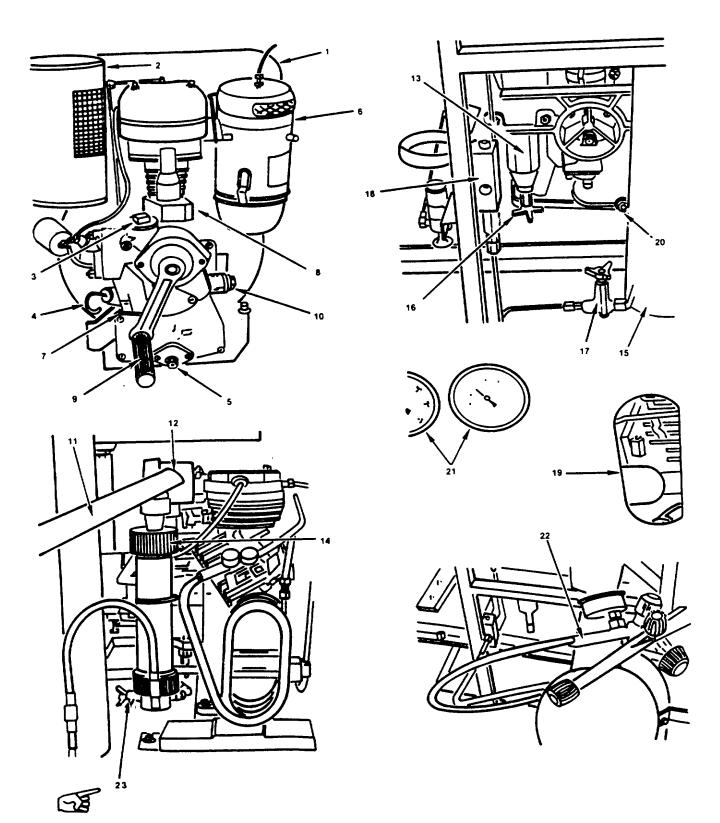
Air Compressor Unit. Identification of Controls and Components
